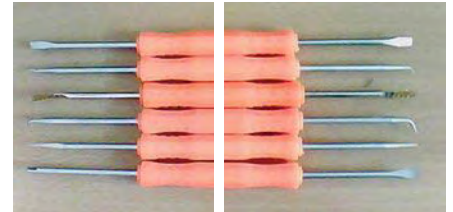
Tools shown in the two images are actually pairs and form six types of different tools: Knife pair is useful for cutting tracks of PCB, chip hold pair for holding surface mount devices while soldering, cleaning brush pair for removing solder from PCB, hook pair for removing components after de-soldering, reamer pair for transforming holes on PCB to larger-desired size and fork pair for aligning component leads to desired direction
